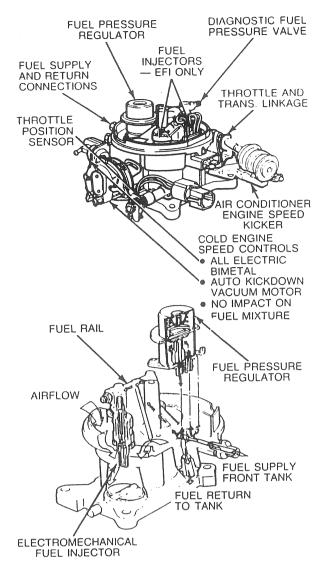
CFI assembly. (Courtesy of Ford Motor Co.)
